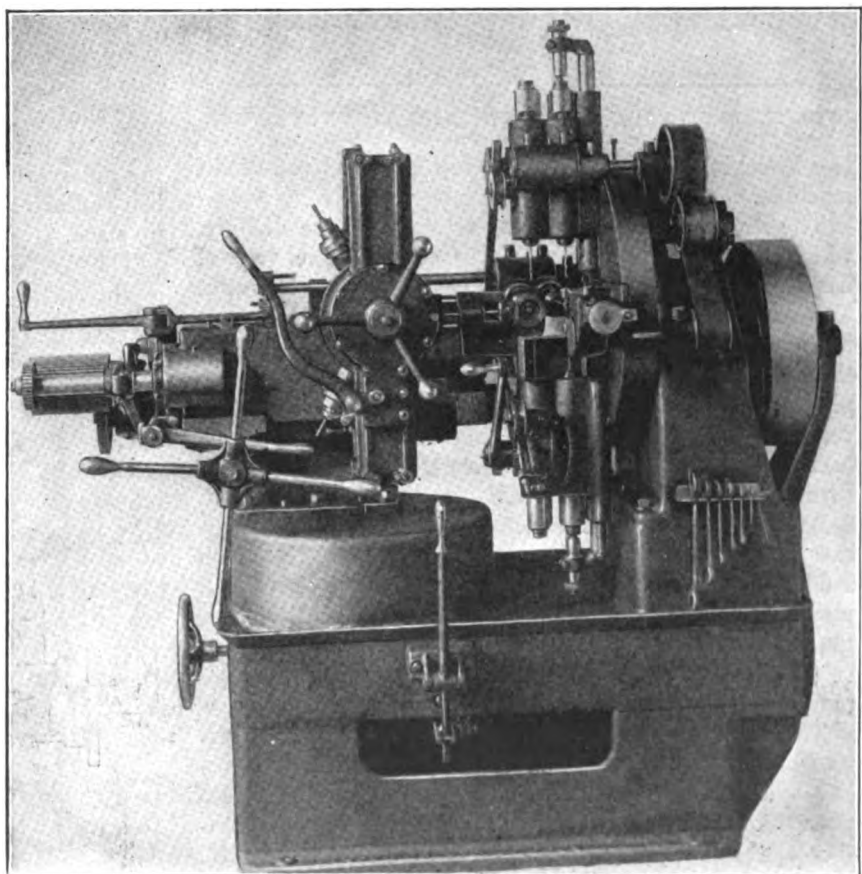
TEN-SPINDLE DRILLING MACHINE WITH TWO TURRETS
